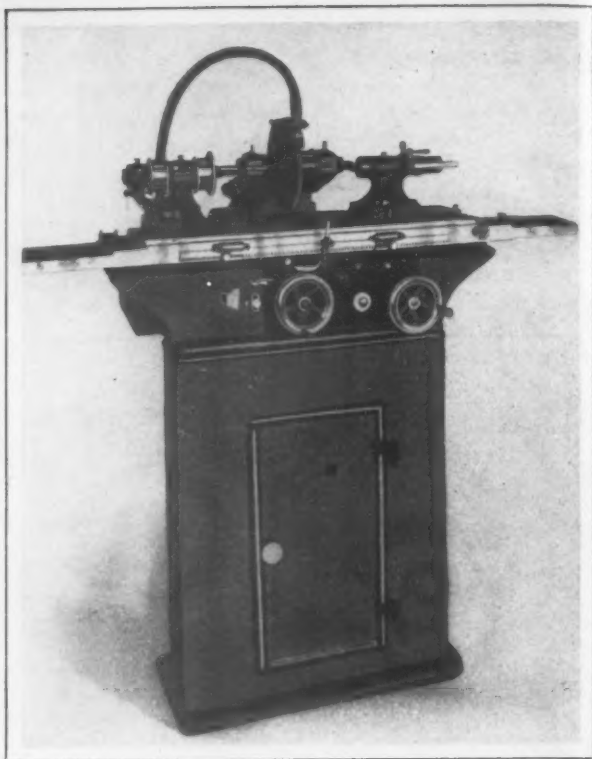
The New No. 1 Universal Grinding Machine Built by the Modern Tool Company, Erie, Pa.
